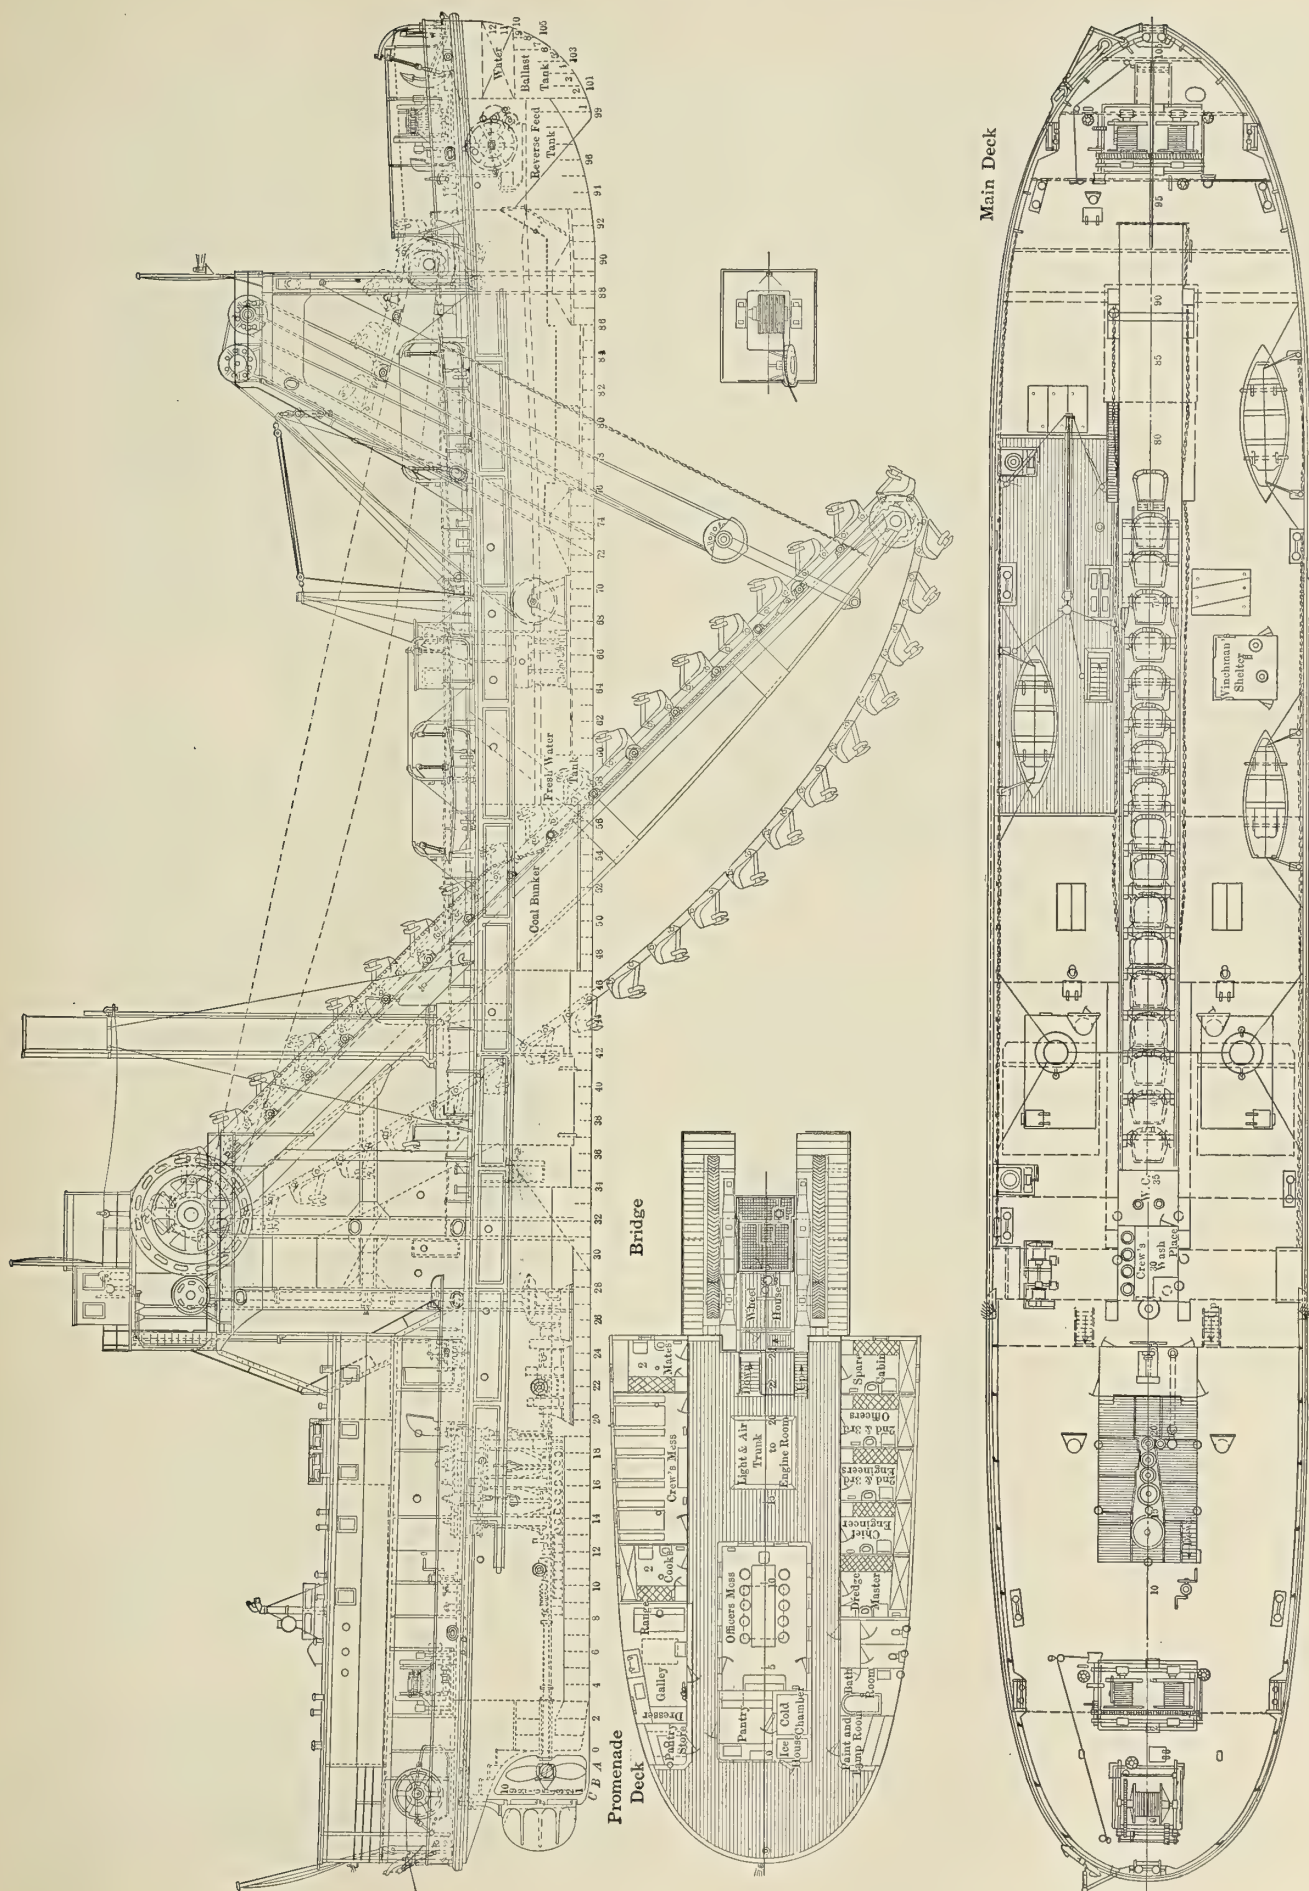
Profile and Deck Plans of Collingwood Dredge
